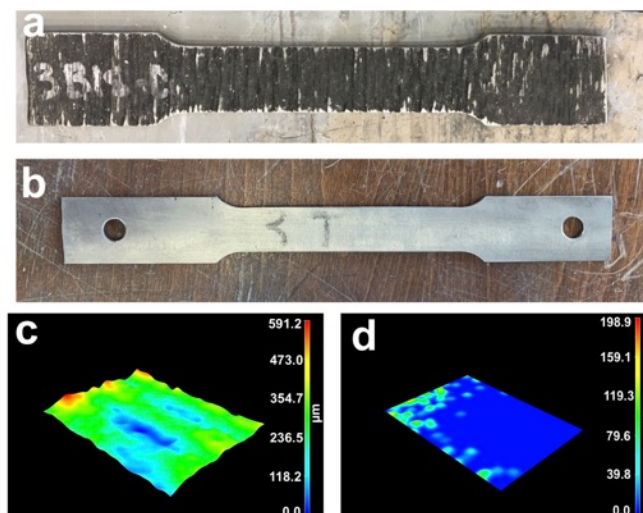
Tensile specimen cut from WAAM plates: (a) as-printed and (b) after milling; surface topography obtained with 3D-Digital Microscopy of the specimen (c) as-printed and (d) after milling
